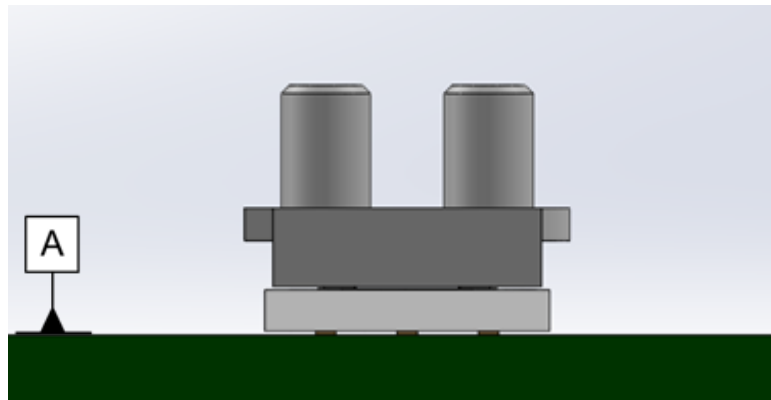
Locate the FLS110 in the Z-axis using the PCB surface (A)
